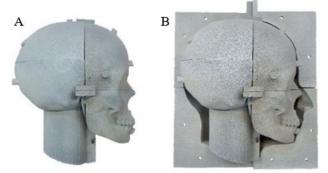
PA12 3D printed skin moulds. A) Male part and B) male and female left side moulds once assembled, with the gap to be filled with silicone rubber simulating skin.
